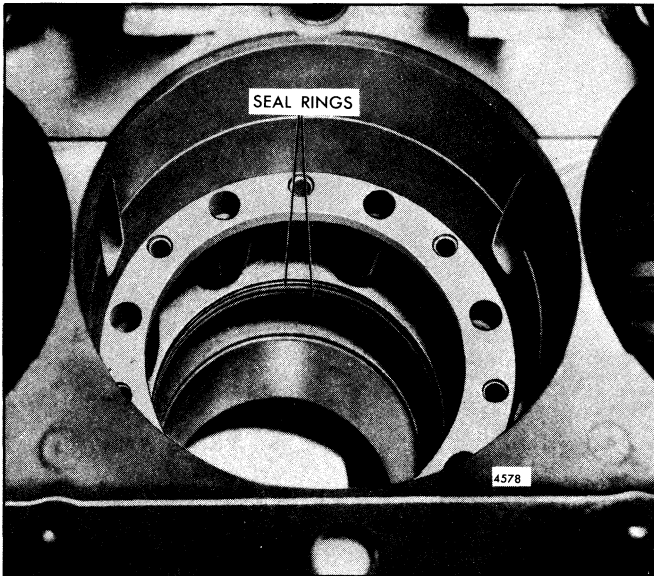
Location of Cylinder Block Bore Seal Rings
